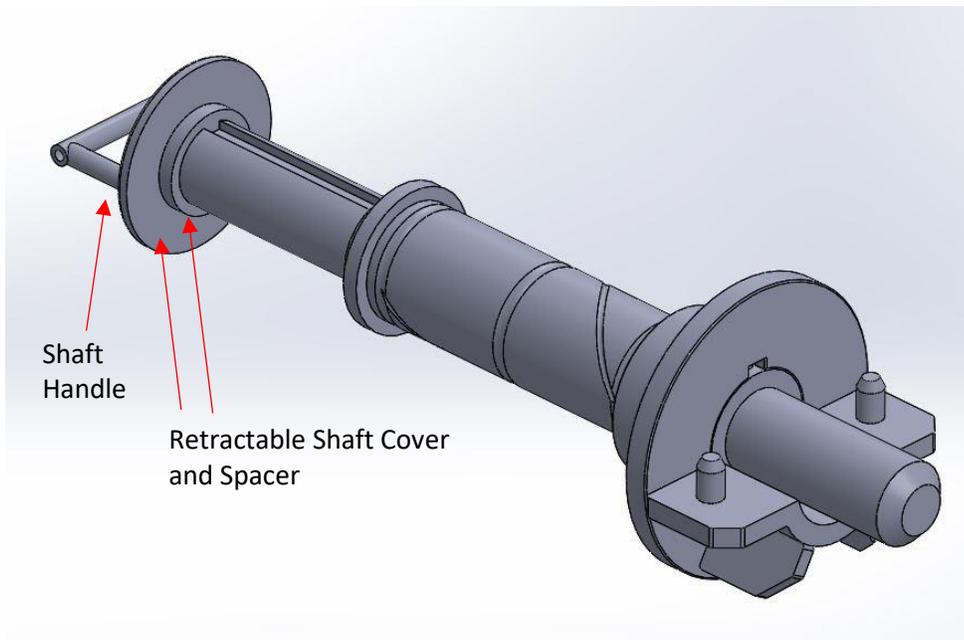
Drive End Iteration #2, Retractable Shaft Assembly
